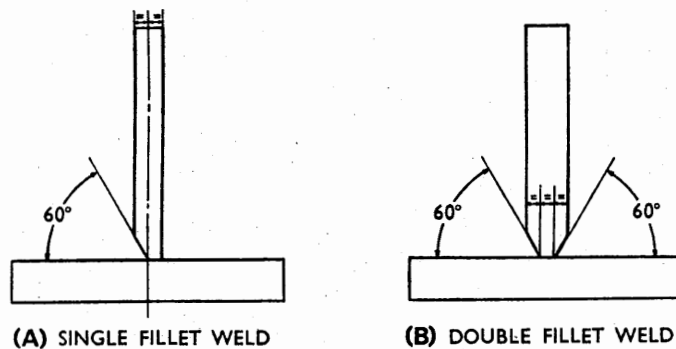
PREPARATION FOR FILLET WELDS
